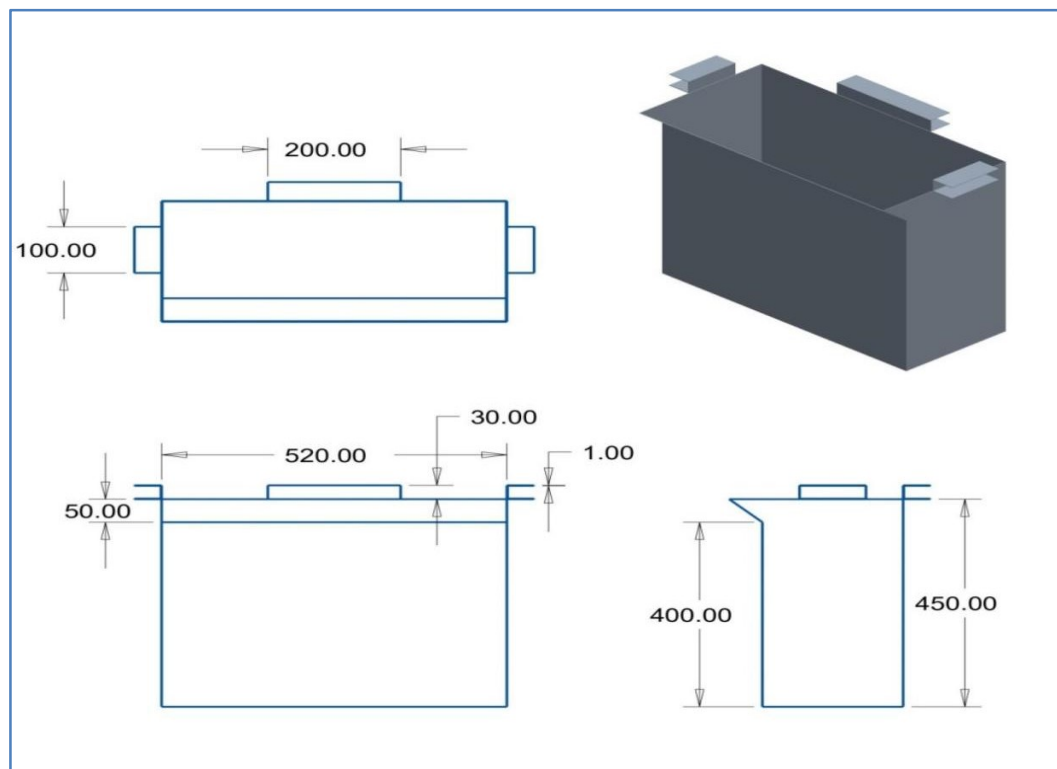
Dimensions of storage tank of leafy crop harvester
